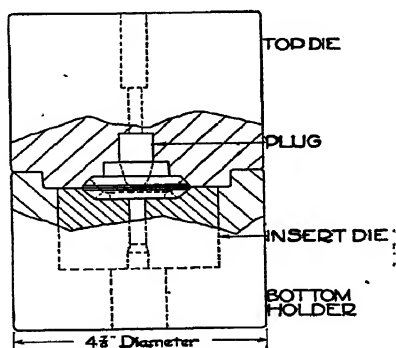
TWO-PIECE DIE WITH PLUG AND INSERT DIE FOR FORMING BRASS GEAR SHOWN IN FIG. 9.
